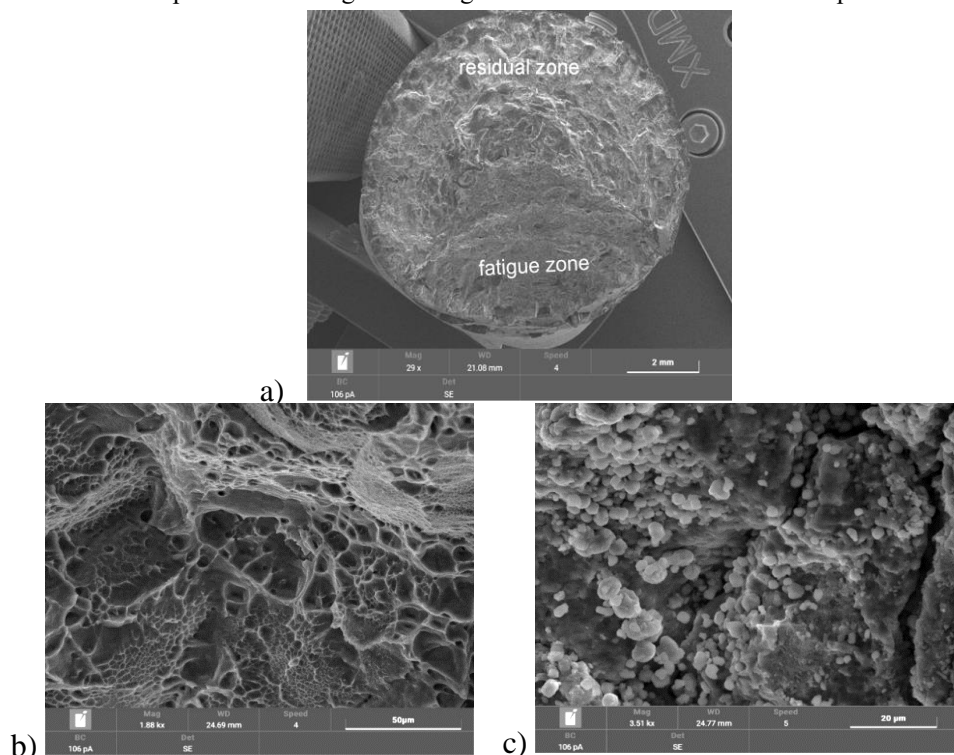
Fatigue fracture of the alloy after T64 treatment caused by torsion: a) fracture morphology, b) surface in the area of the fatigue zone, c) surface in the area of the residual zone (specimen 5 – 11 004 384 cycles).
